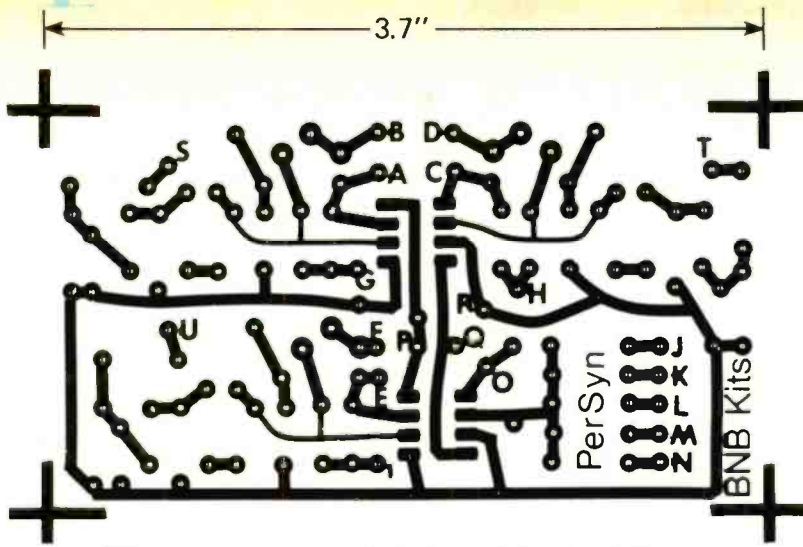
FOIL PATTERN of the percussion synthesizer printed-circuit board. You can etch your own or get them in the complete kit of parts that is available.
